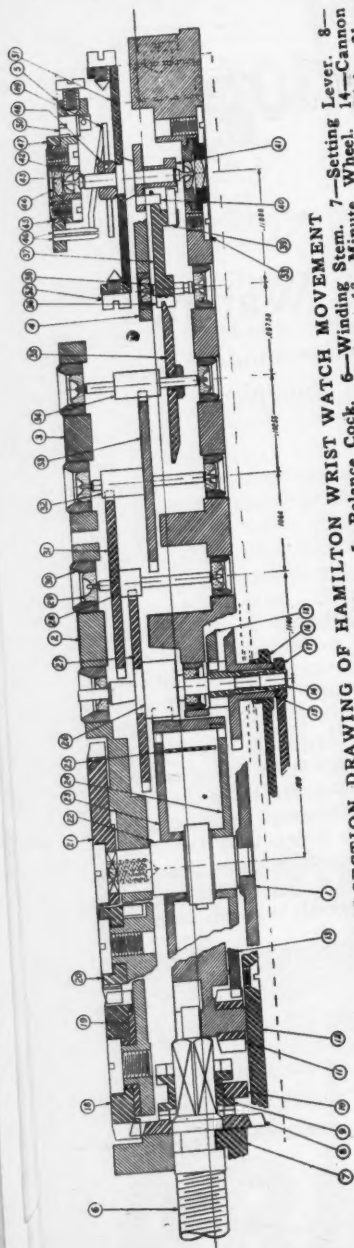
CROSS-SECTION DRAWING OF HAMILTON WRIST WATCH MOVEMENT
